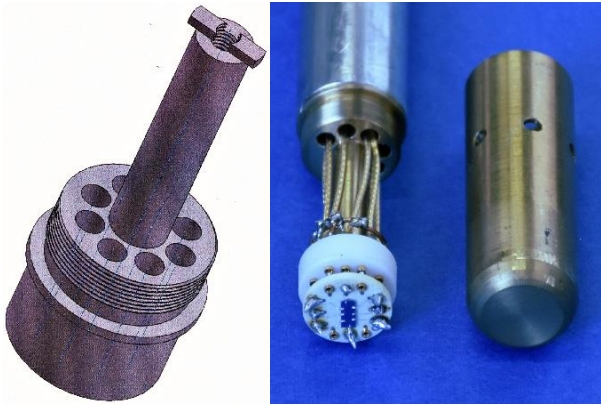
The bottom side of the insert, which slides into the cryomagnet bore. (left) Diagram of the drum that supports the sample holder and hosts the 9 coaxial connections. (right) Photo of the assembled probe: the brass shield (right) has been removed to show the TO-8 socket, which hosts a GaAs device on its TO-8 holder, and the 9 coaxial electrical lines.
